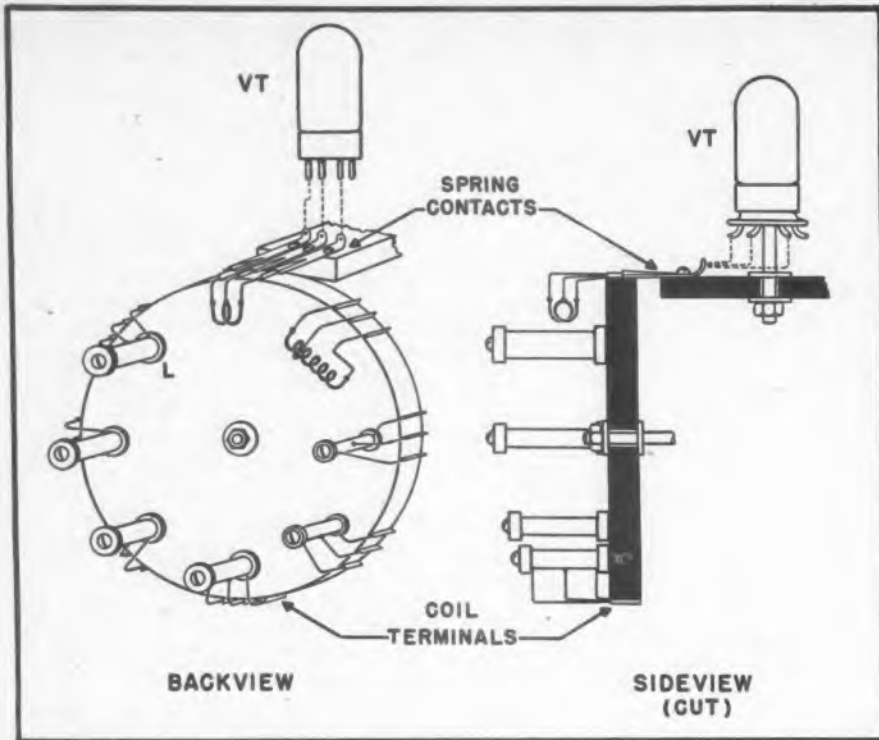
Turret-type coil mount is preferred from mechanical and electrical standpoints; is a practical production design which maintains low stray capacitances with controlled tolerances
